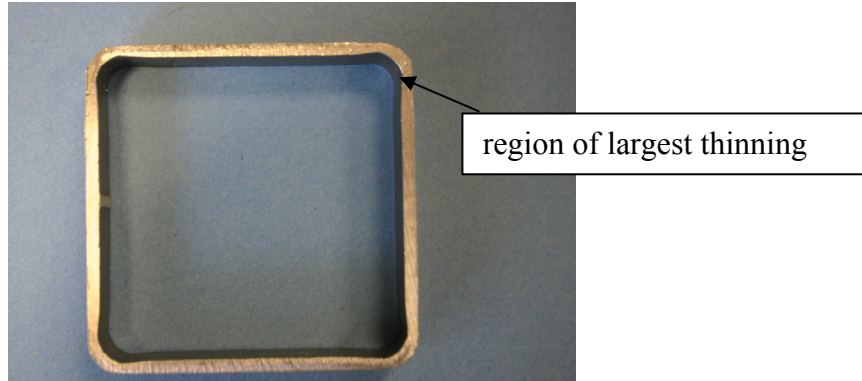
Cross-section of tube formed using high pressure process with a 6 mm corner radius and 60 mm of end-feed
